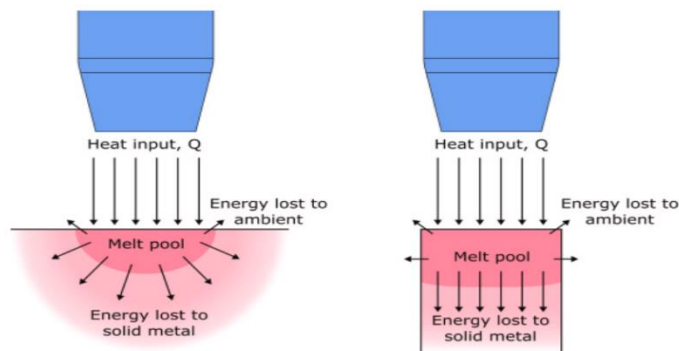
Difference of melt pool cross sections between arc welding and WAAM [10]
